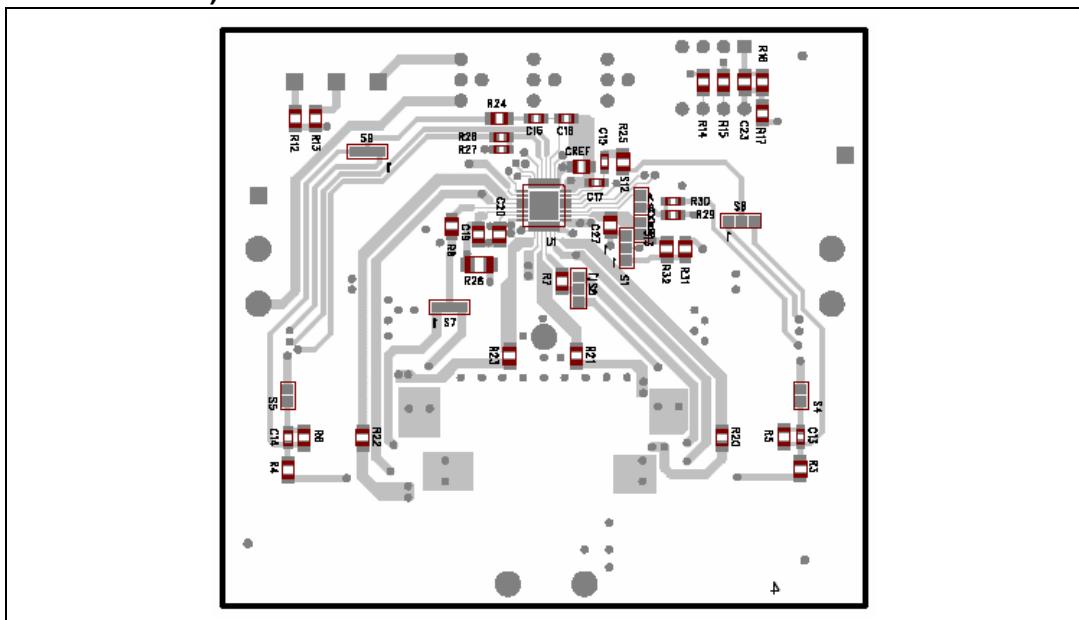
PM6680 evaluation board layout - bottom layer (PM6680 and component side)
